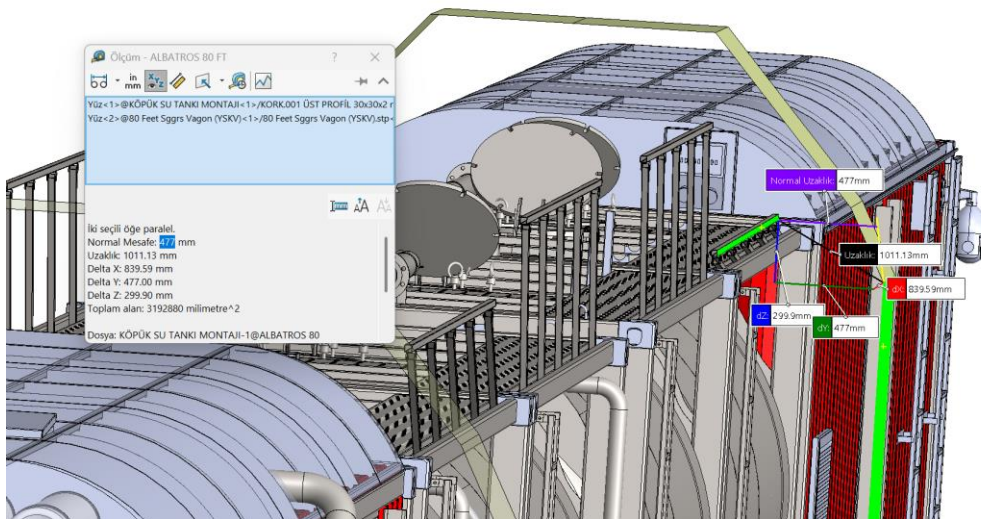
Guardrail arrangement on ISO tank following envelope clearance testing.
